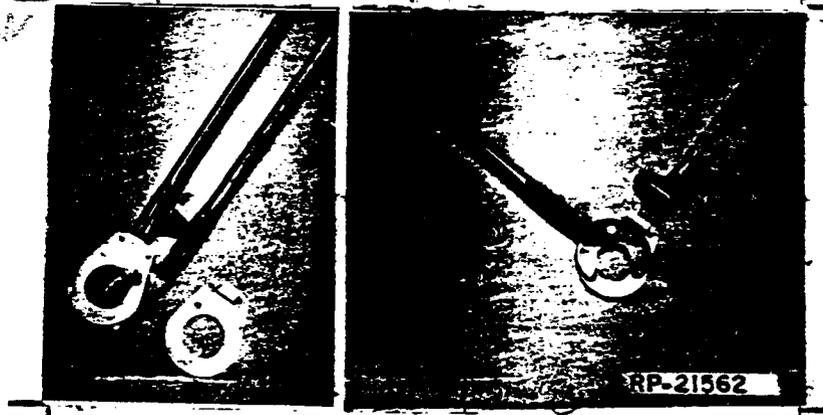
CABLE SHEARS (R-1514) WITH ATTACHED R-4073 CABLE-CUTTER-PLATE
